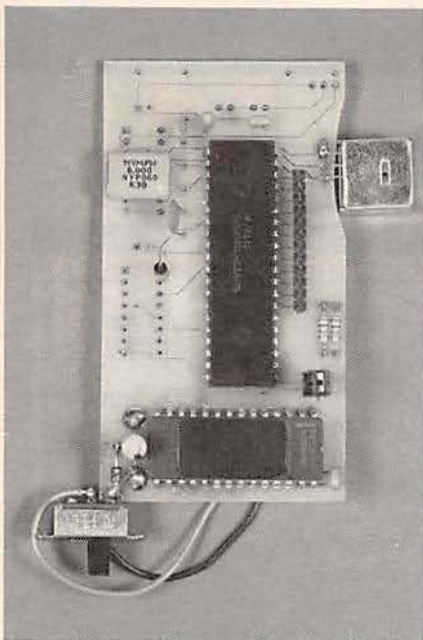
THE RECEIVER BOARD can be mounted on the project you are adapting it to. You can attach the GPIU52X IR module directly to the PC board as shown here, or run wires to it off-board.
